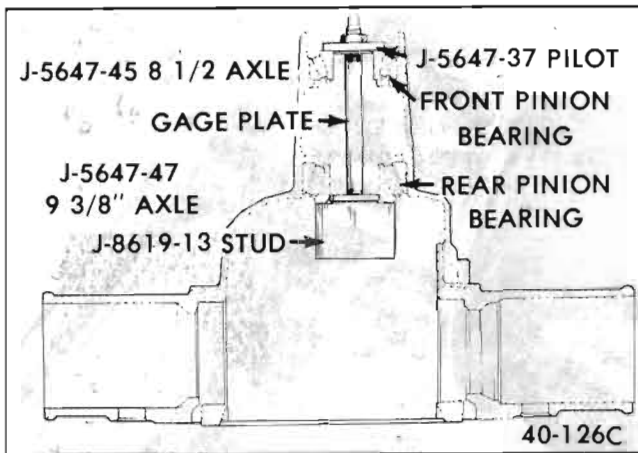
Pinion Gage Plate Installed in Carrier
